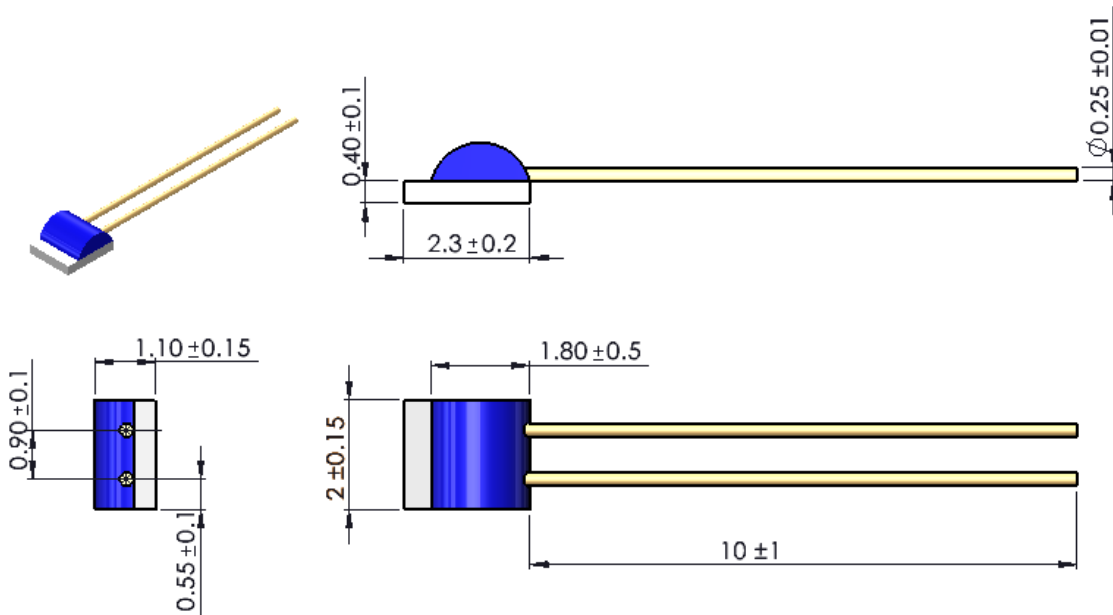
Mechanical dimensions of Platinum Temperature Sensor
